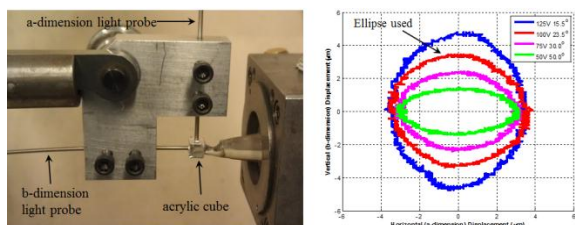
Measurement of Ultramill elliptical tool-path using MTI photonic sensors.
